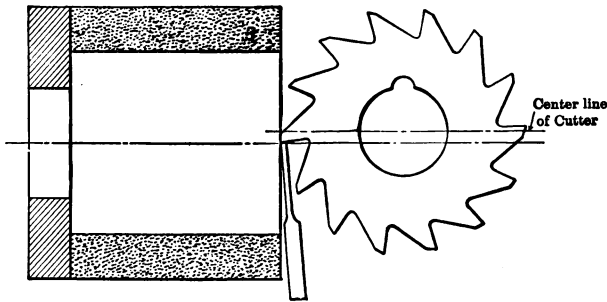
Setting Stop Pin for Grinding Clearance on Milling Cutter Teeth
